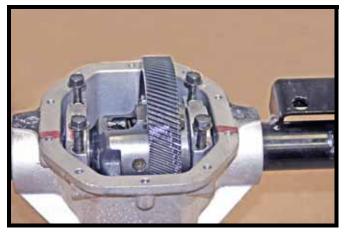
Installing Saddle Bolts and Saddles Differential Cover Plate Installation
